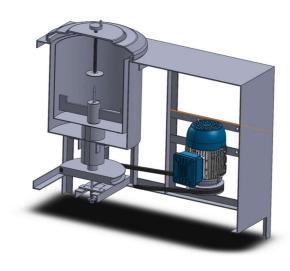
Section view of the Automated Yam Cooking and Pounding machine. [Interior Spring mechanism].
